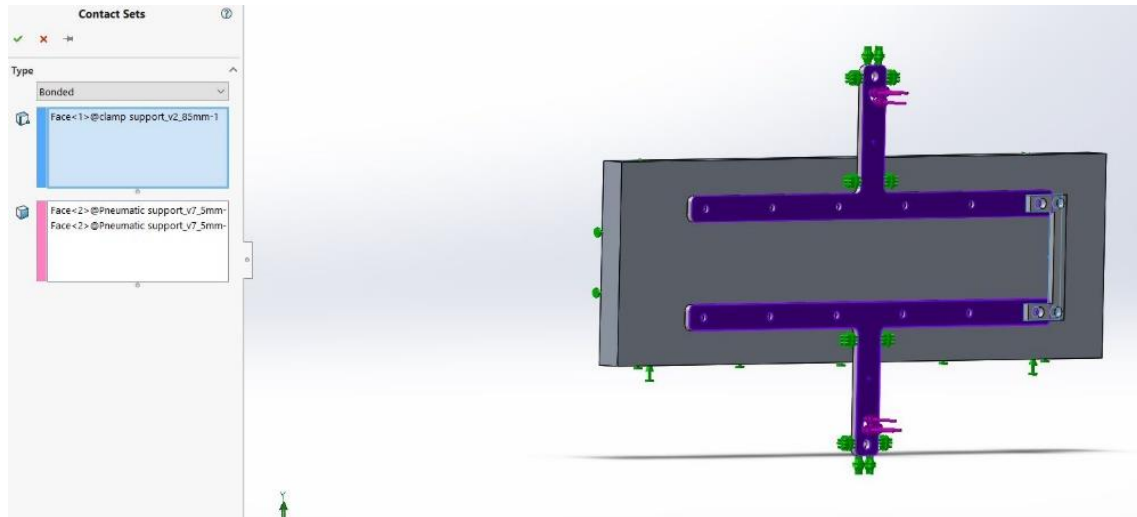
Setting up connection sets for the clamping arm to be no penetration.
